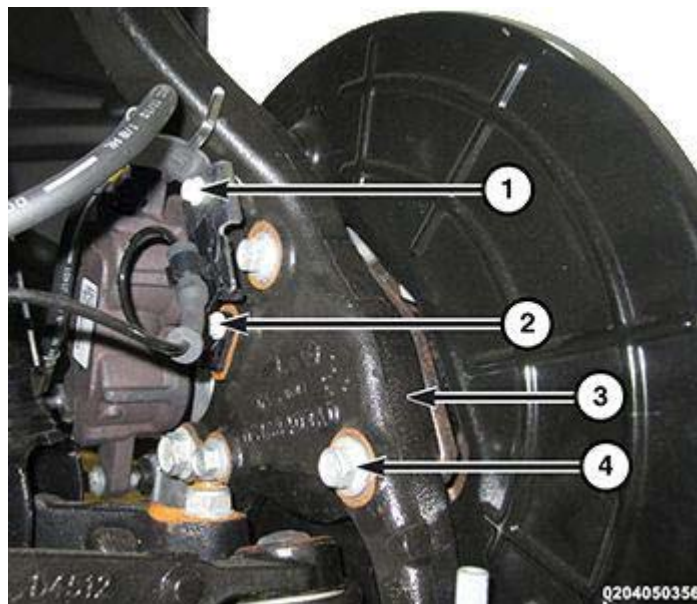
Front Brake Hose Support Bracket Bolt & Front Hub And Bearing To Knuckle Bolt
